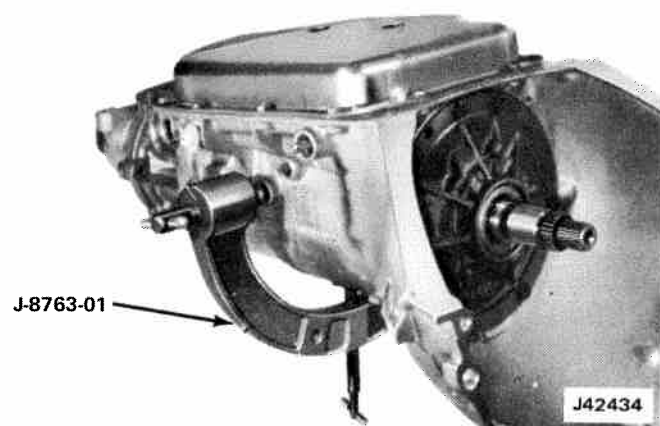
Transmission in Holding Fixture J-8763-01
